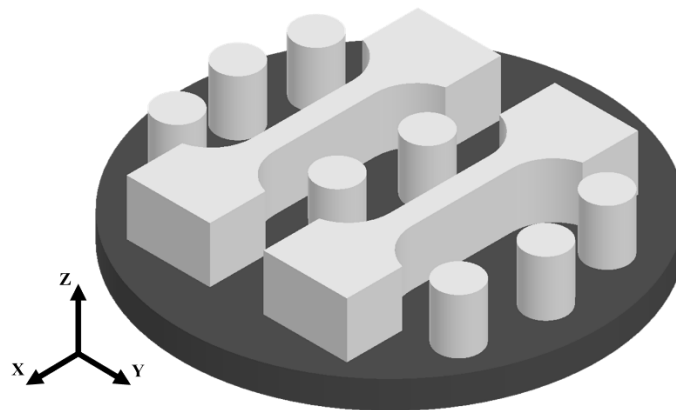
program of the printing samples for mechanical and corrosion behaviors tests
